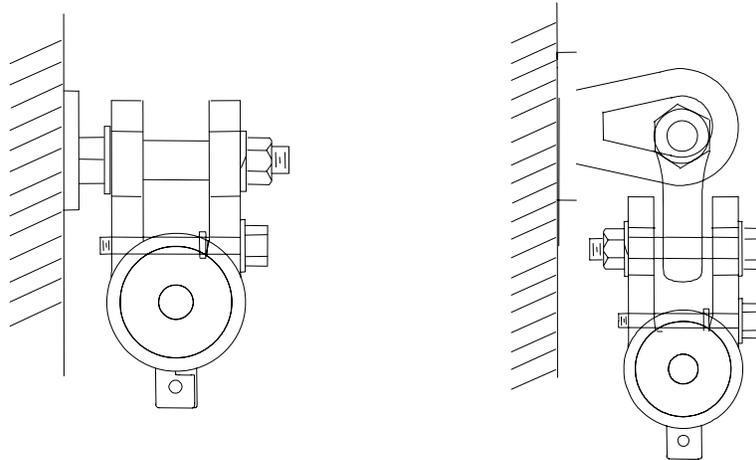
Tangent Supports, Fixed (left) and Suspension (right) Assemblies
